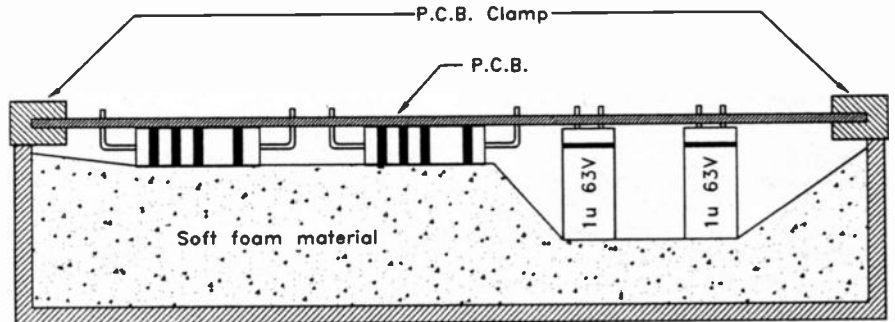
A printed circuit construction frame can hold large numbers of components in place while they are soldered to the board.
